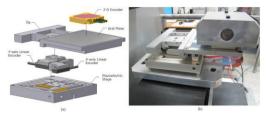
Experimental setup; (a) sensor arrangement; (b) assembly on the milling machine
